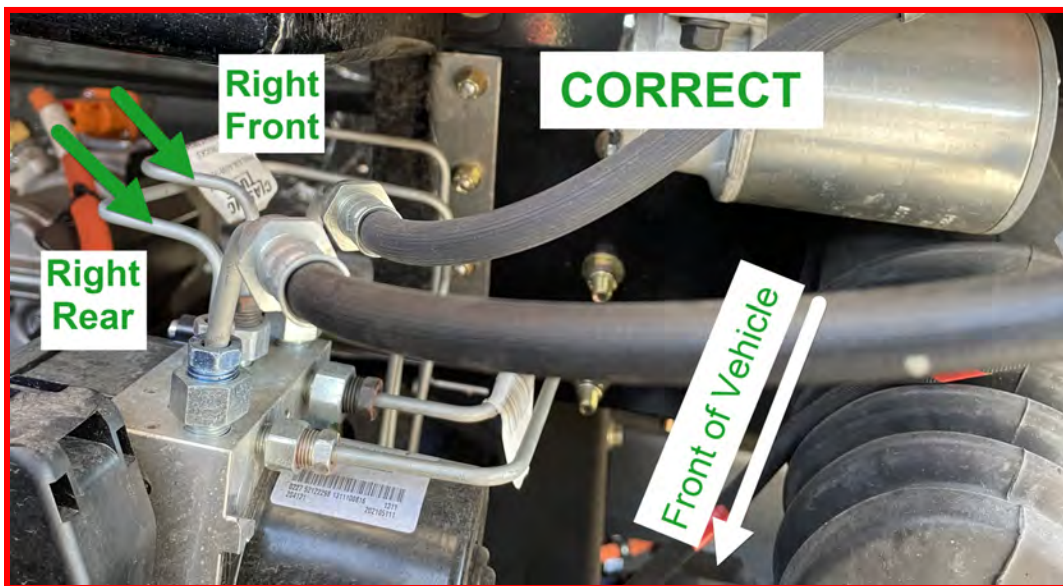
CORRECT Brake Line Routing (Right Front & Right Rear)
